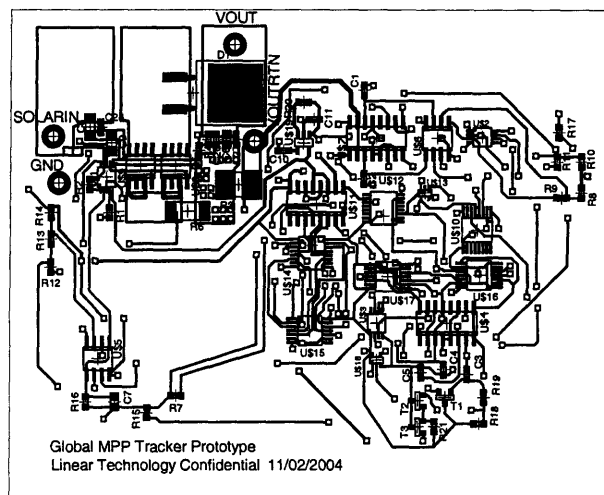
Top Layer of Prototype Printed Circuit Board
